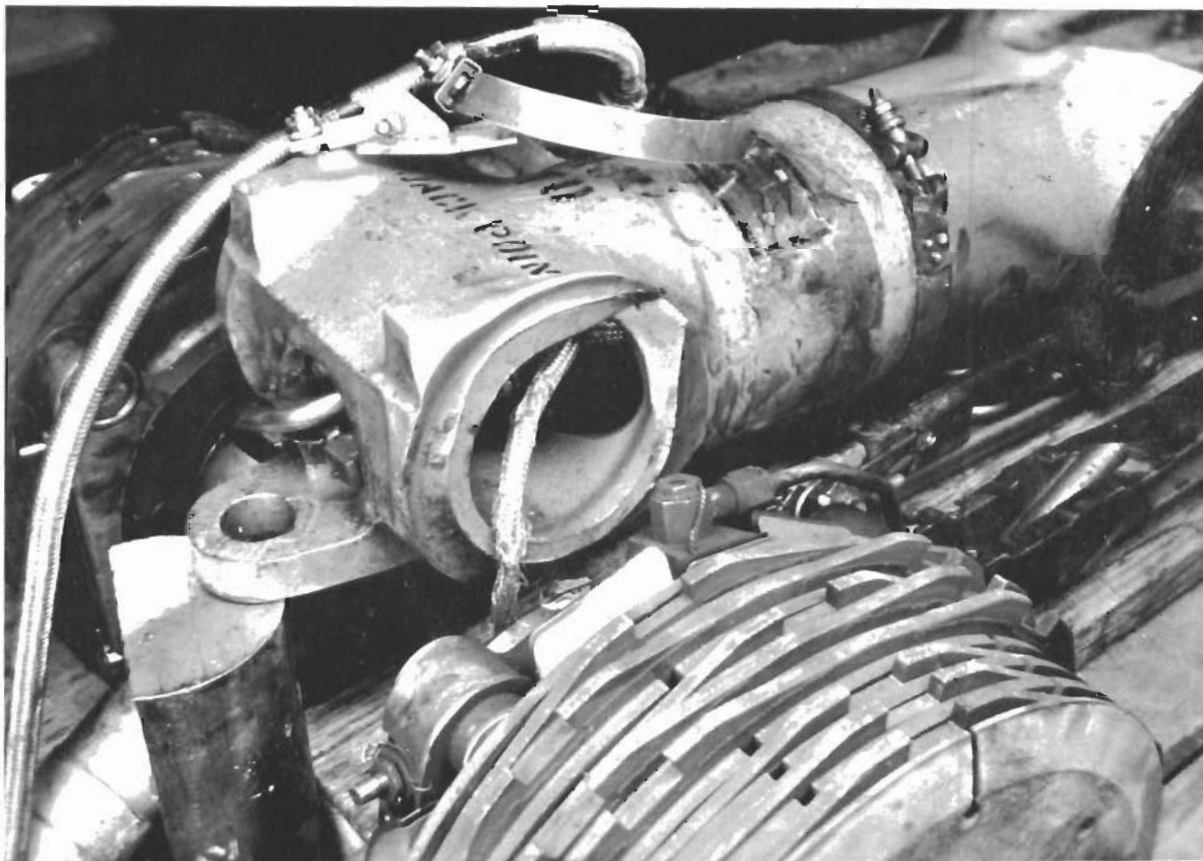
Axle Beam Failure 11/61 AISI 4340 (260-280 ksi UTS)
